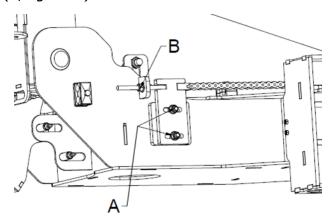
Adjusting the Shock Absorber Slide Chain Tension
